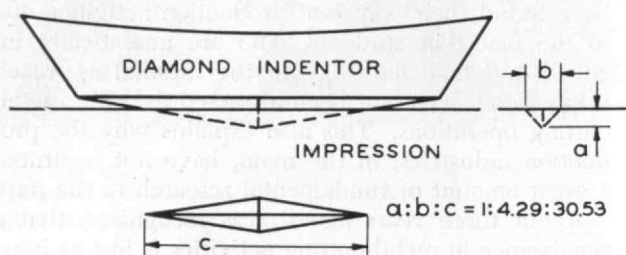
Diagram of diamond indenting tool used to make impression in cutting tool to determine wear during use.
